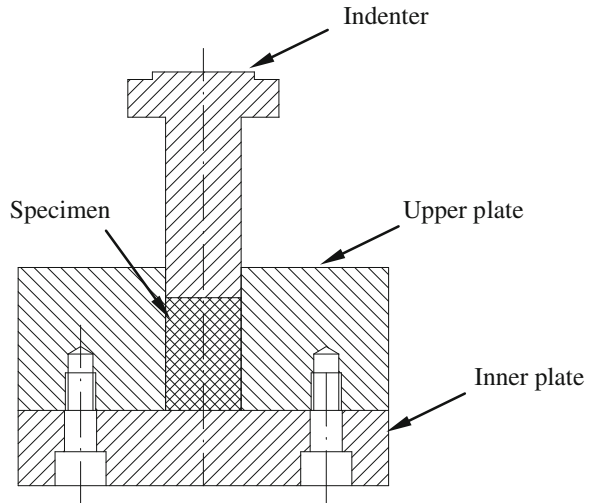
Assembly of the specimen in equipment for volumetric compression test
